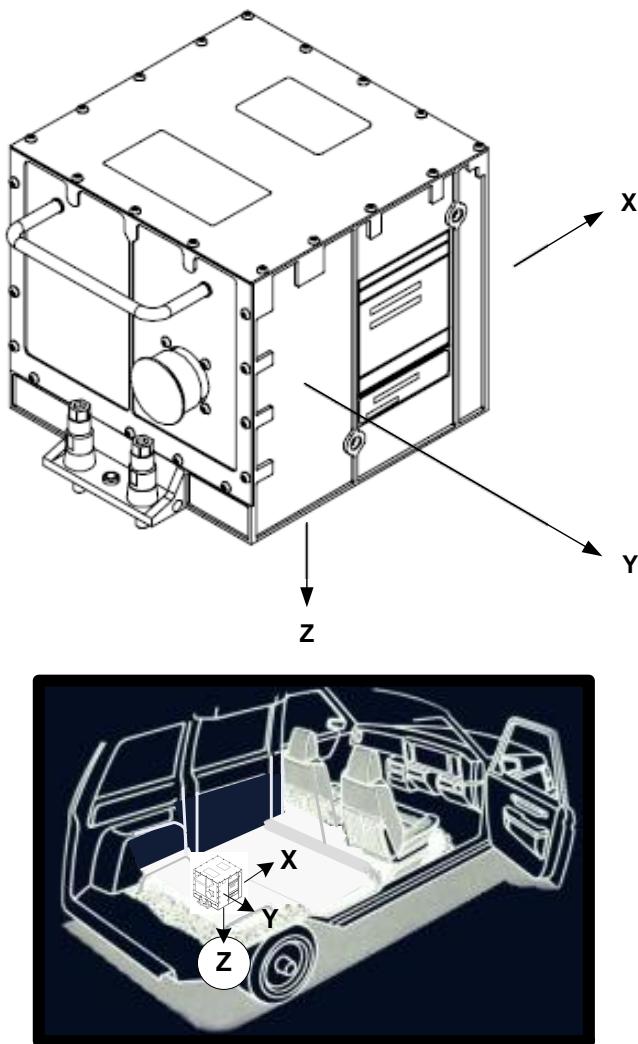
(2 of 4) IMU Type 21 Outline - Rear View
